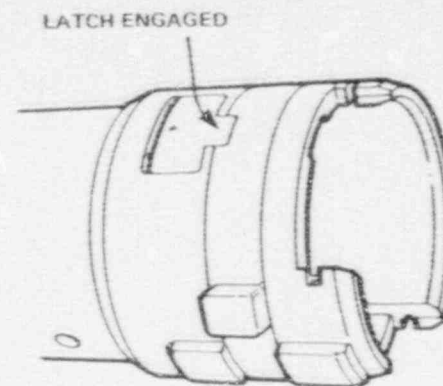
GUIDE SLEEVE AND INSERTION TOOL
